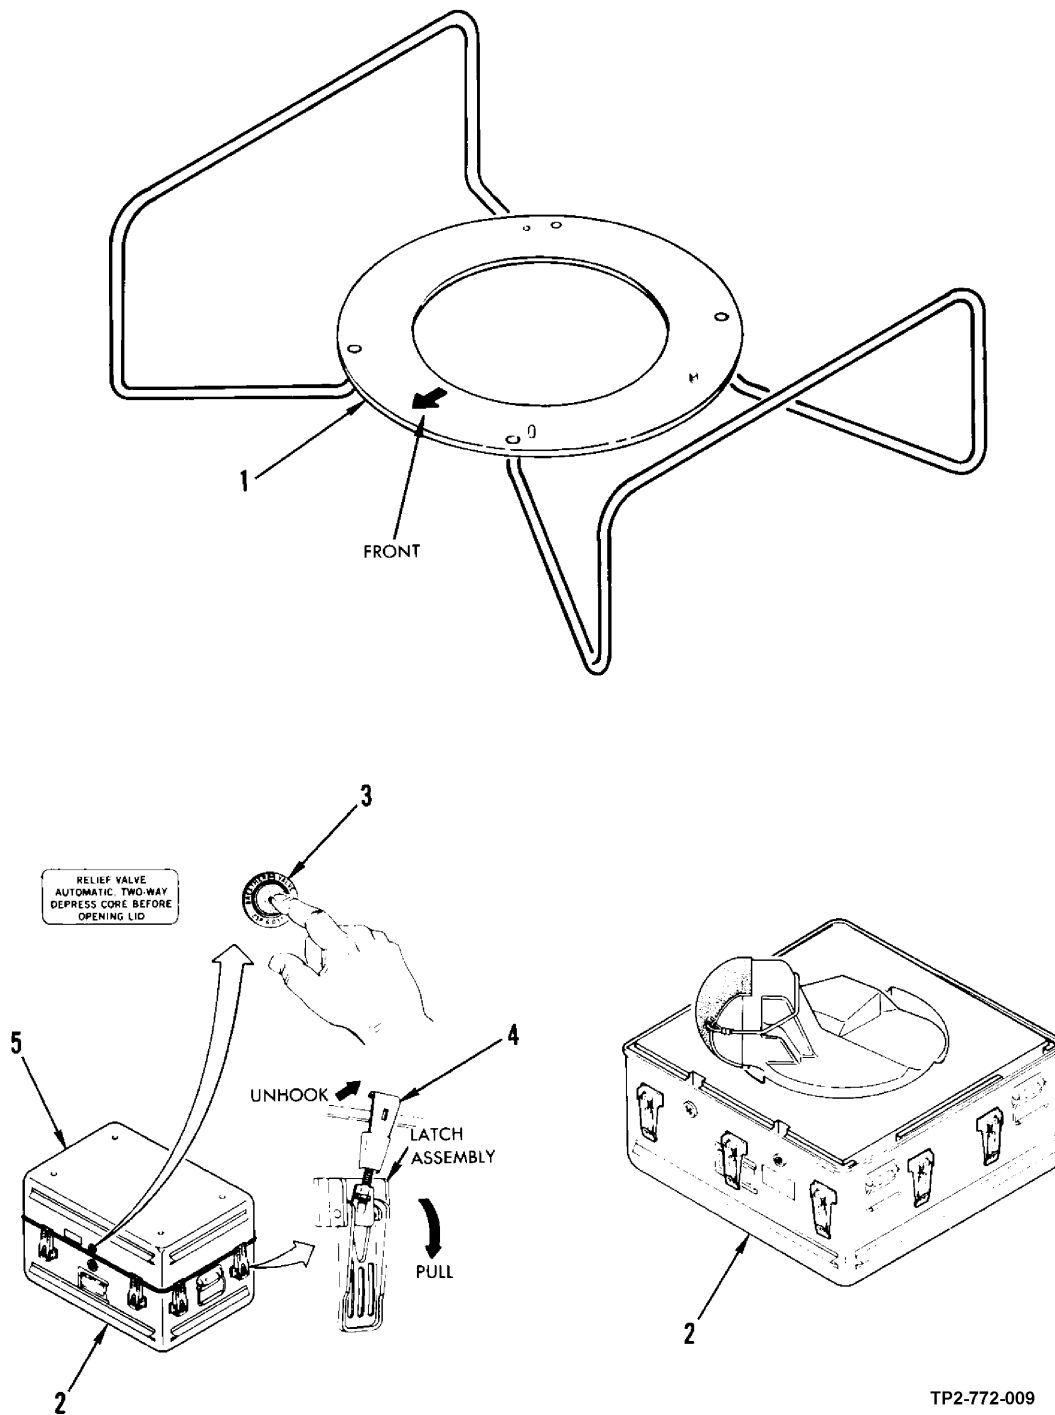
PNVS Holding Fixture and Shipping and Storage Container
